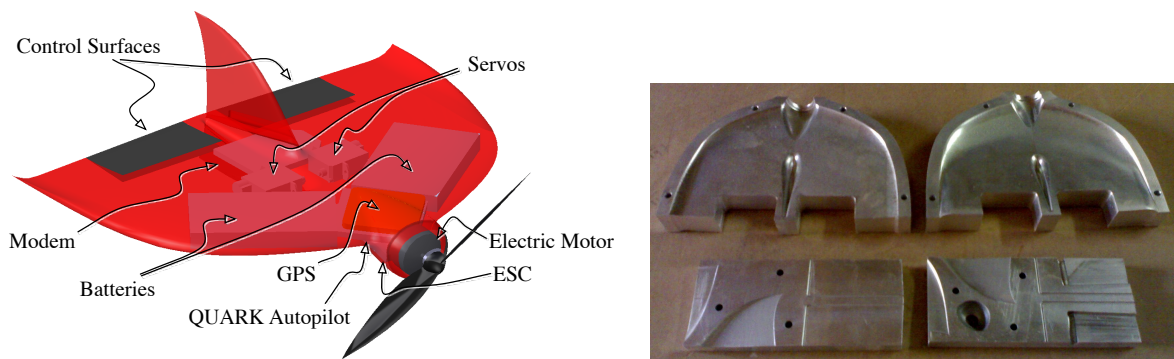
The CAD representation of the final QUARK MAV with the internal components and the aluminium CNC molds on the right
